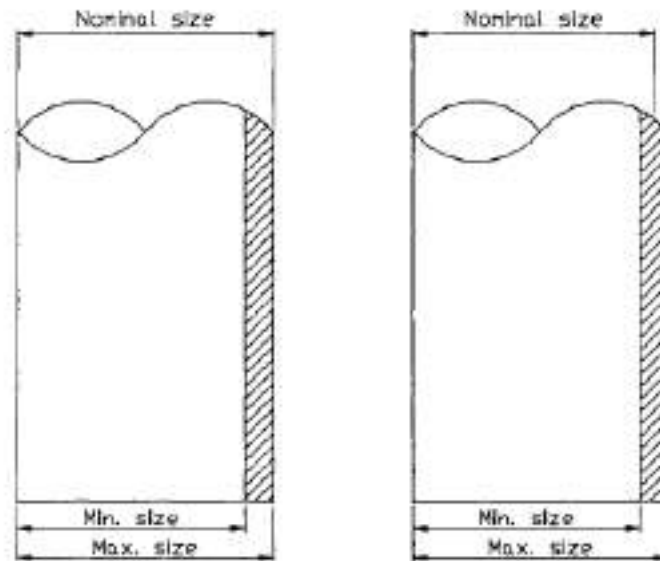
Bilateral and unilateral dimensional tolerances
